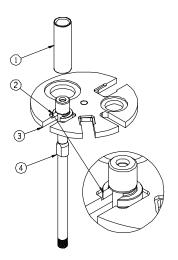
Inserting Valve Sleeve onto Valve Bushing
